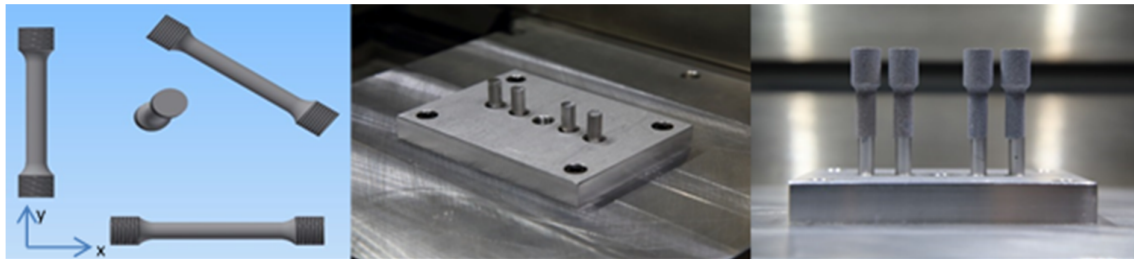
Specimens building steps: (a) full length CAD model of the specimen's orientations on the building platform, (b) the prepared half specimens inside the machine, (c) the half specimens after building process is completed (two stage printing)
